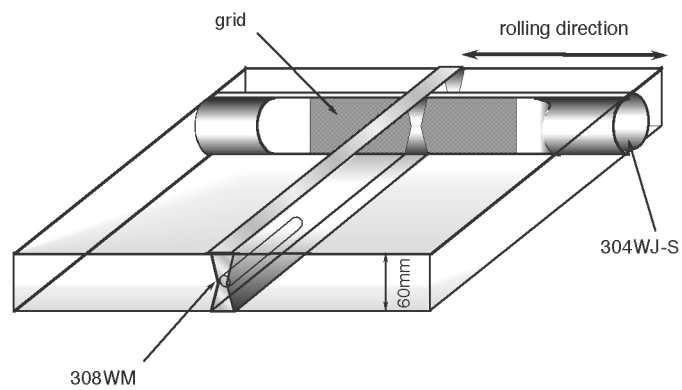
Sampling of test specimens from 304 welded joint.
